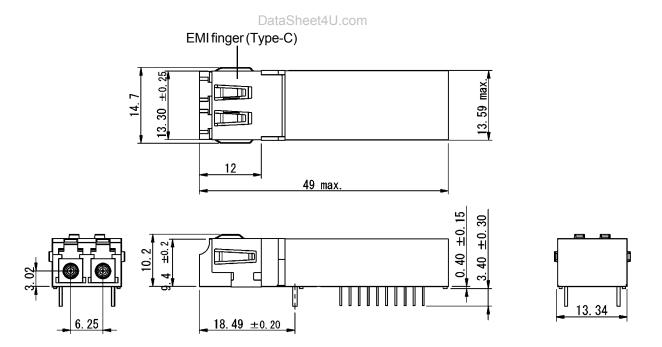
Outline Dimensions (SCM6005-JL-Z#)
